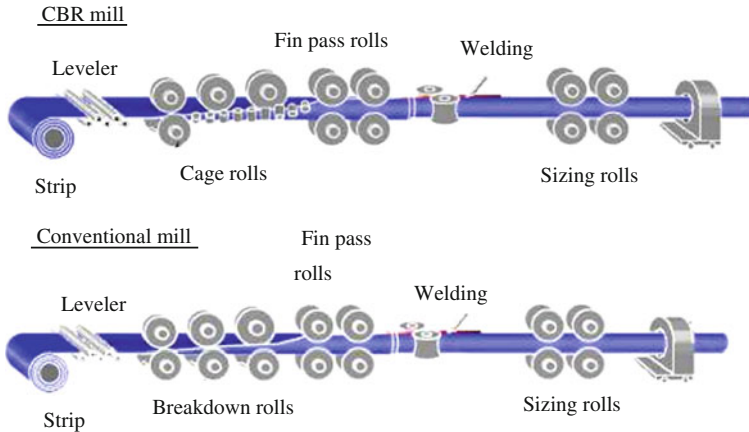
Schematic illustrations of outline of CBR mill and conventional mill [6, 7, 9]
